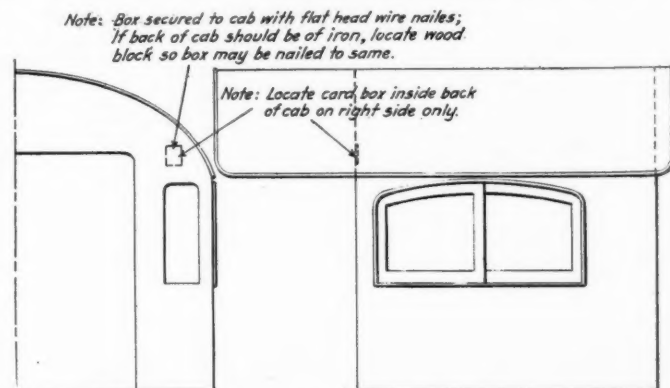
Location in Cab of Box for Holding Boiler Washout Card.
